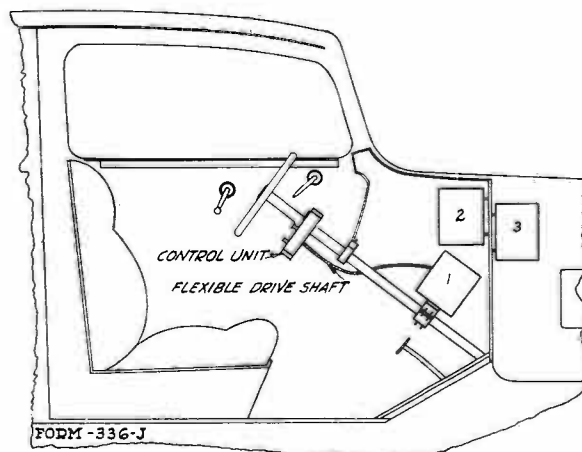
Possible Chassis Locations—Position 3 used only when absolutely necessary.
